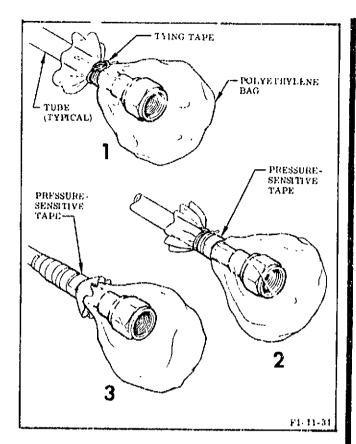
B. Drain System Isolation Bag Installation (Typical)
